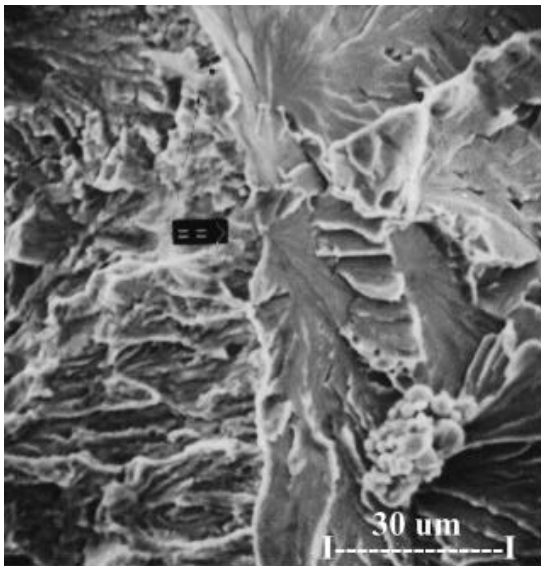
Fracture surface of a three-point bend specimen at -196°C .
